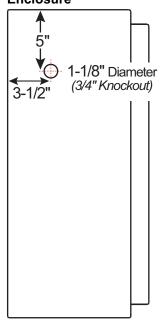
Assembling the Beacon Assembly for the Finish Roller Enclosure
